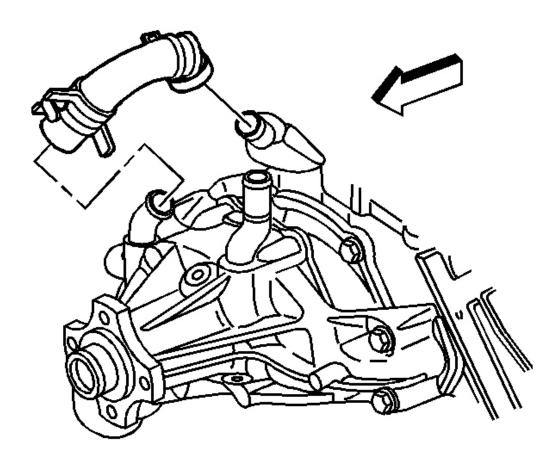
View Of Water Pump Inlet Hose & Clamps Courtesy of GENERAL MOTORS CORP.
